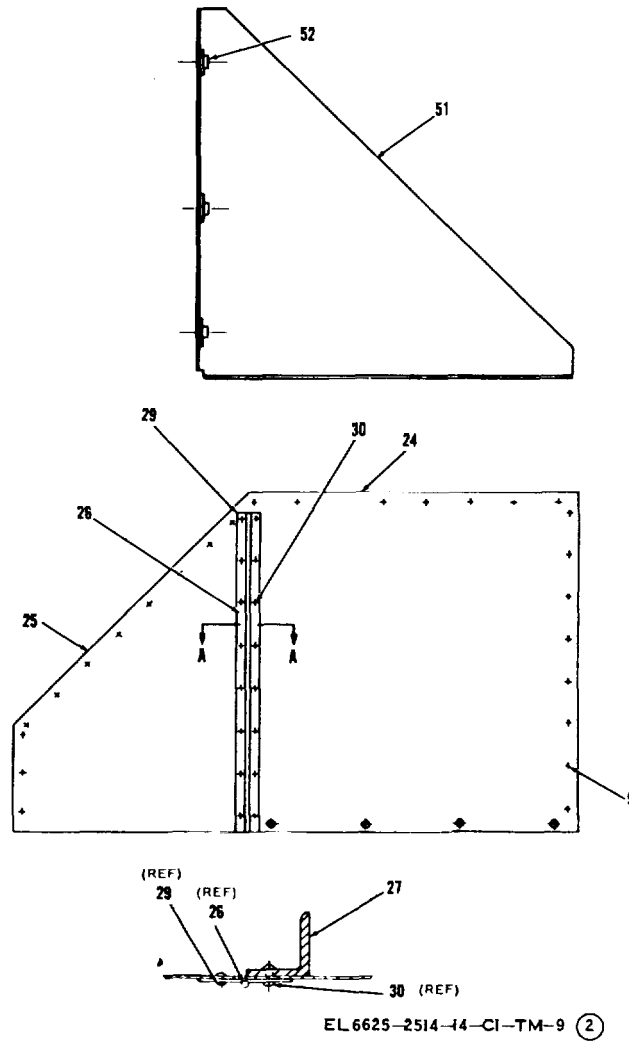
(2). U7622 chassis assembly (sheet 2 of 5).
